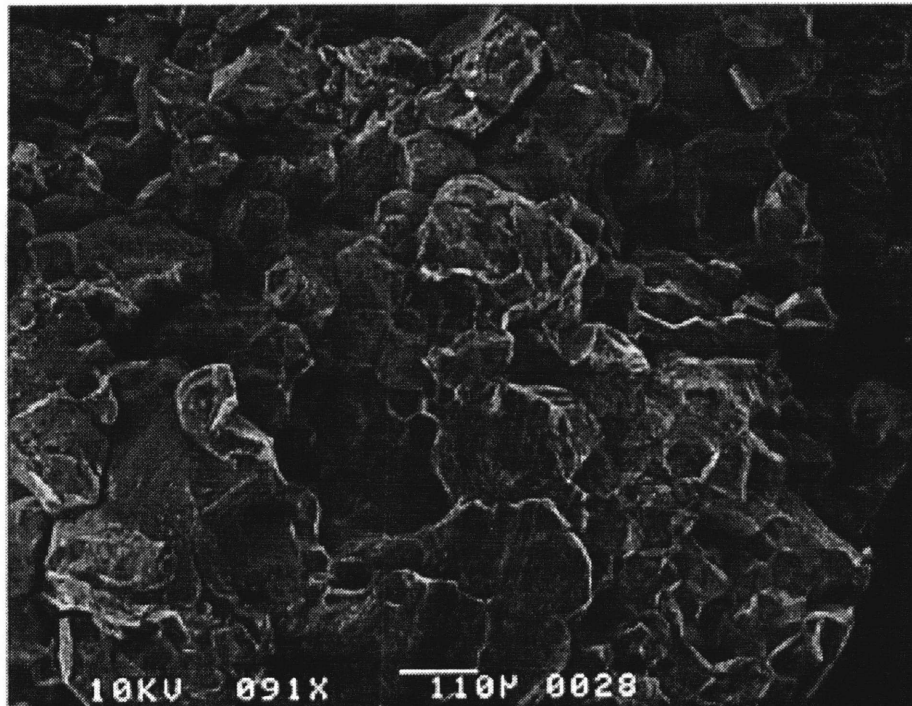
Lower right of Figure 5-4 depicting intergranular and granulated facets on fracture surface of specimen 2003 (CP 304,AJ9139,furnace sensitized at 650°C/10hr,0 n/m²).
